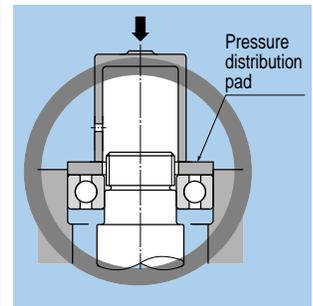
Fitting sleeve pressure against inner /outer ring simultaneously
